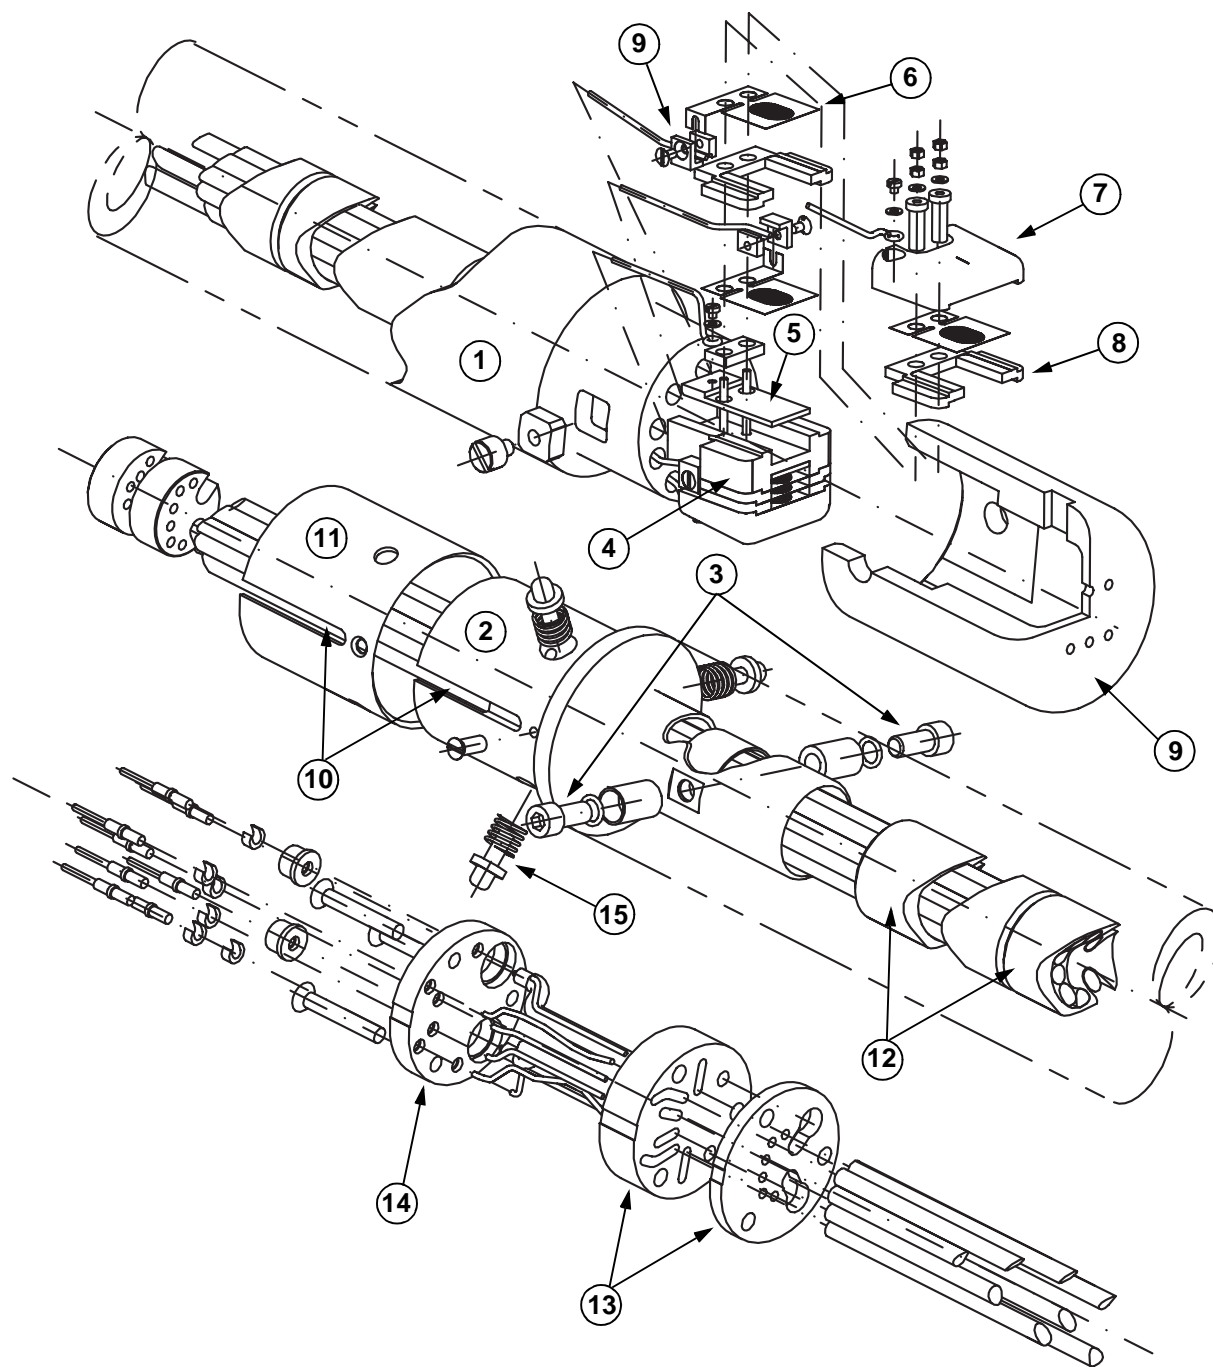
Exploded, isometric decomposition of the JET RFA probe head, including details of the RFA cavities, protective housing, probe body, cable pathways and interface to the reciprocating probe drive. The numbers identify important components of the design that are described in detail throughout Sect. III.
